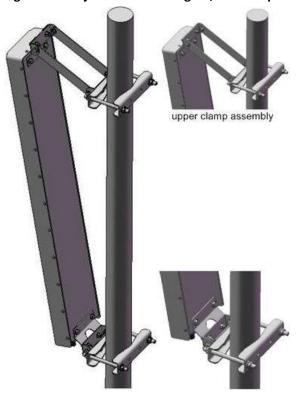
Adjustable Mounting Kit, with 'V' Blocks
